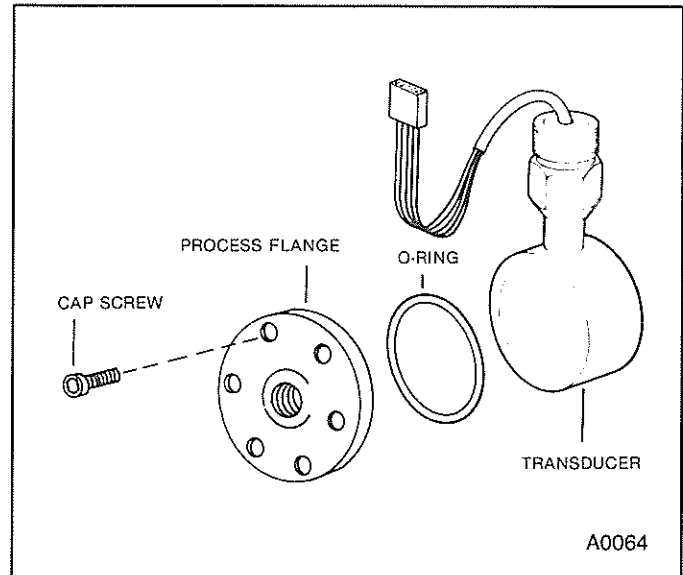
Transducer Assembly (BCN56/57 and BCN66/67)
